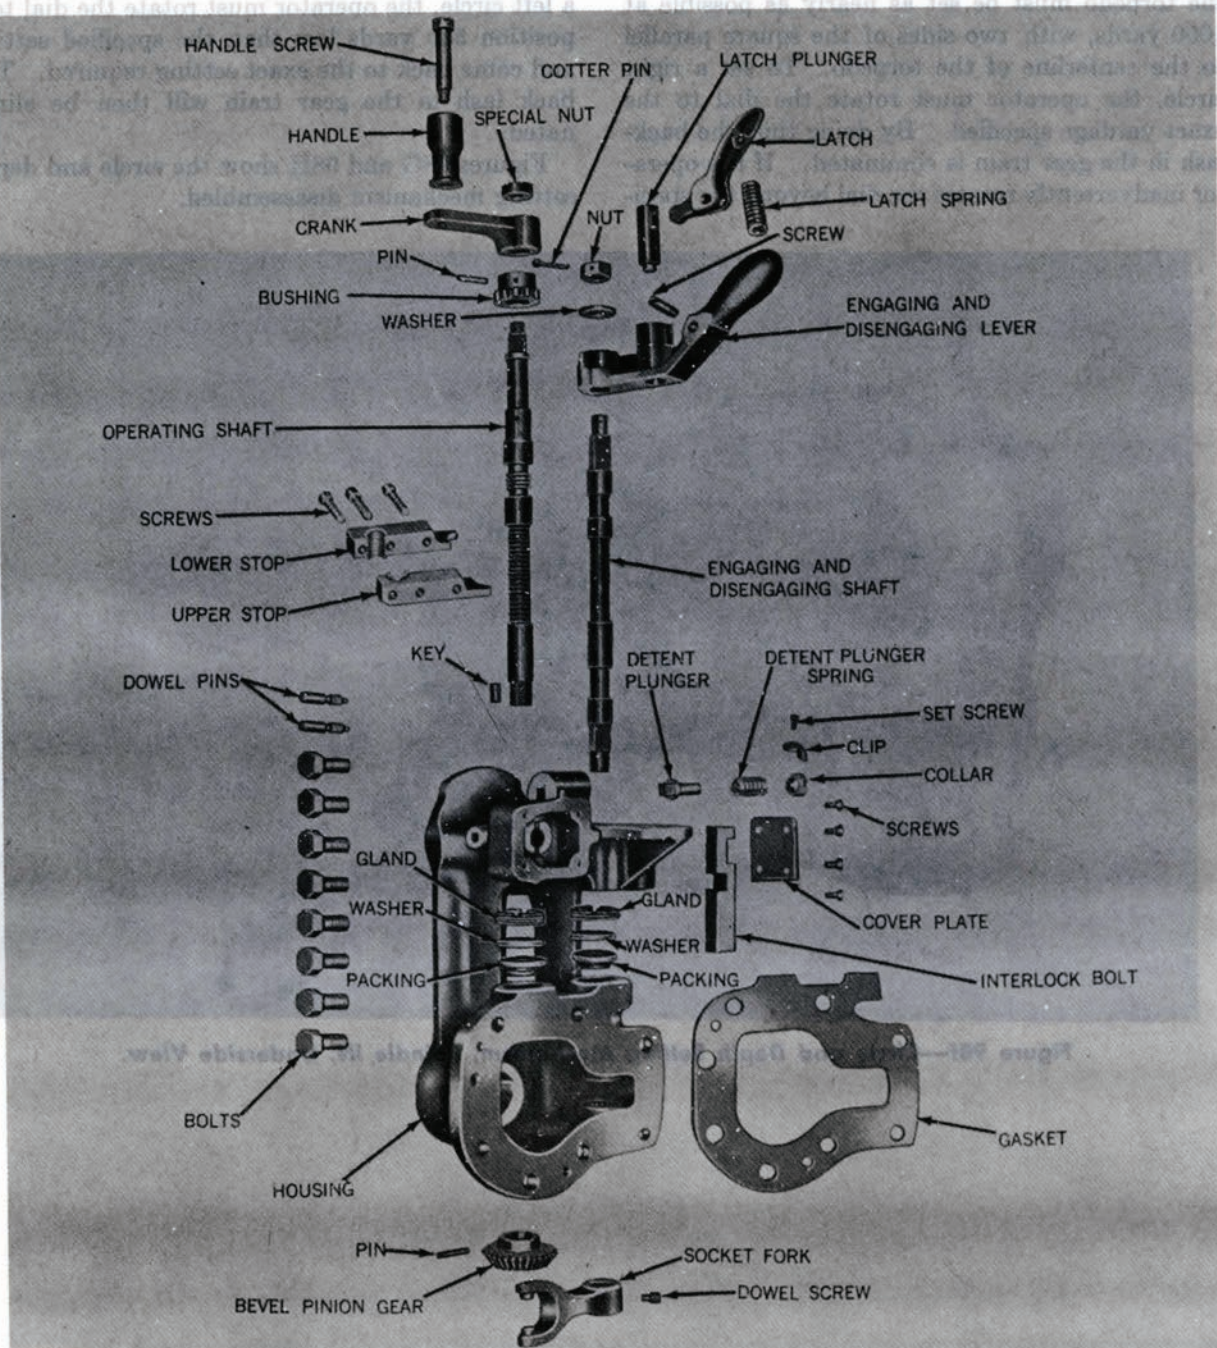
Circle and Depth Setting Mechanism, Horizontal Assembly Parts.
